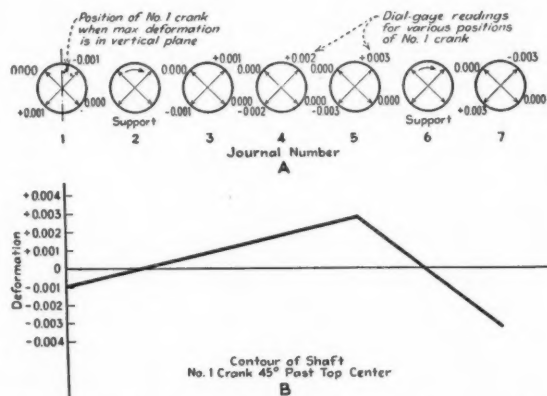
A—Method of recording dial-gage readings to check for shaft deformation.
